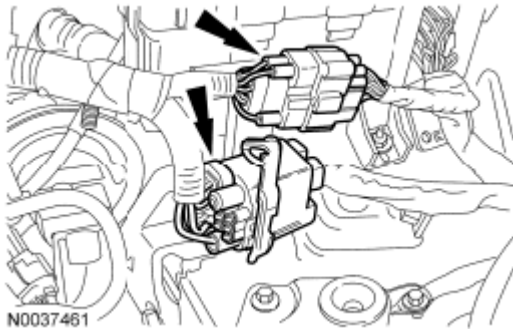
Locating Engine Wiring Harness Electrical Connectors
